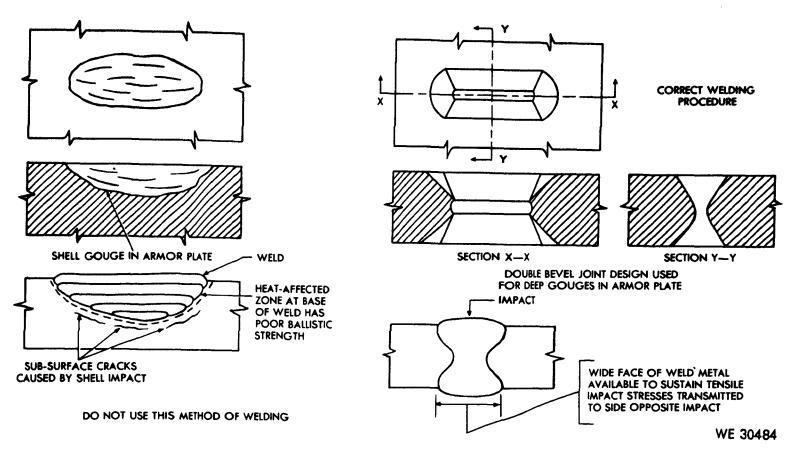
Welding repair of gouges in surface of homogeneous armor plate.
